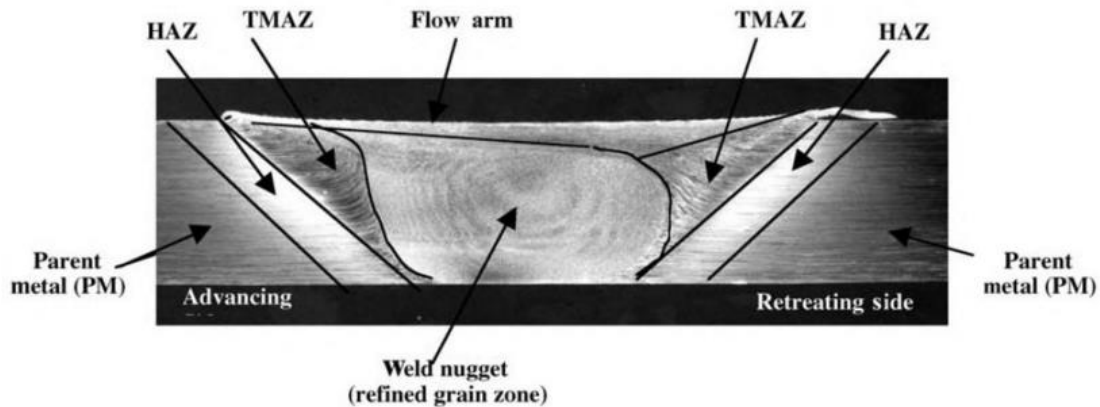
Transverse section of friction stir weld showing different regions of the weld. HAZ, heat-affected zone; TMAZ, thermo-mechanically affected zone and weld nugget [1, 4].
